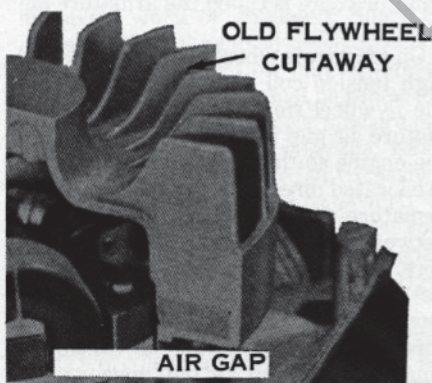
Where armature core and ignition coil are located inside of flywheel, an old discarded flywheel can be cut away as shown to provide air gap adjustment fixture.
